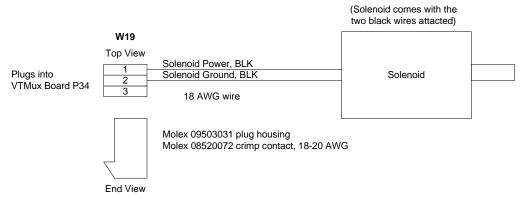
VTMUX BOARD P34 TO BRAKE SOLENOID
